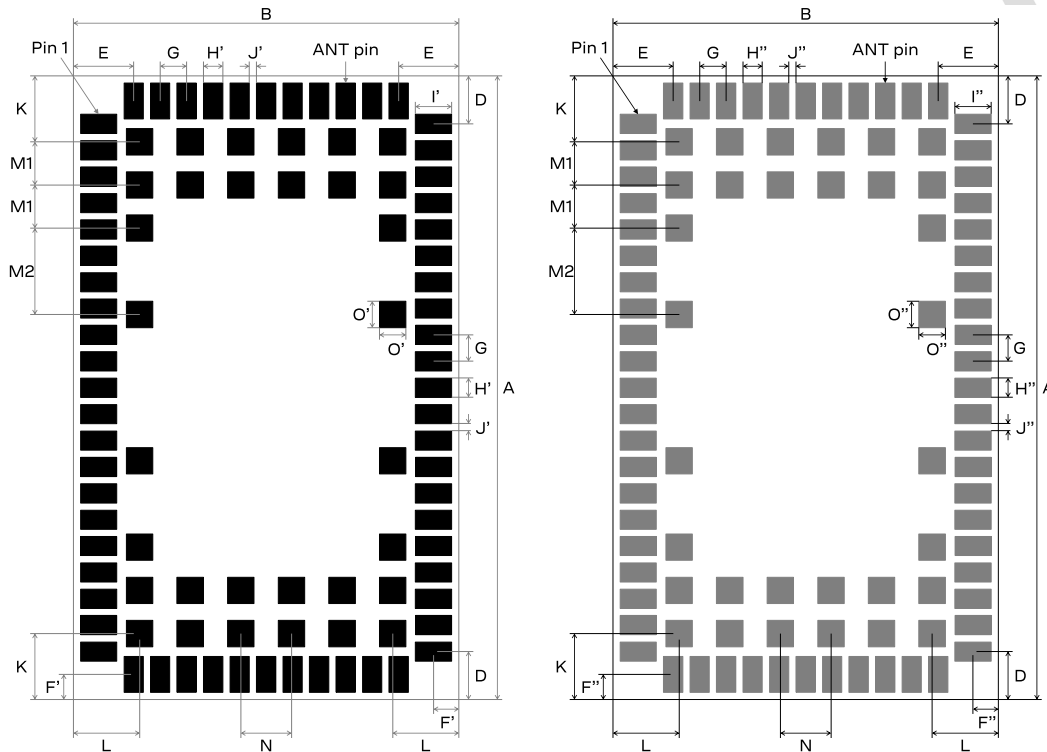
SARA-R5 series modules suggested footprint and paste mask (application board top view)
